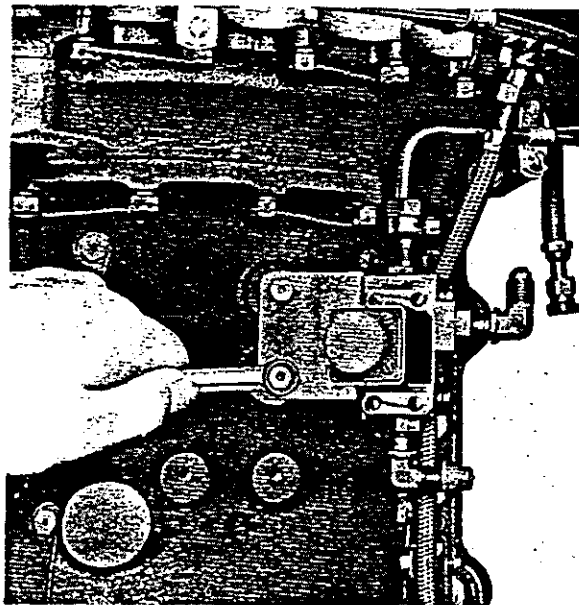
Removing Starting Fuel Solenoid Valve Bracket Bolts
